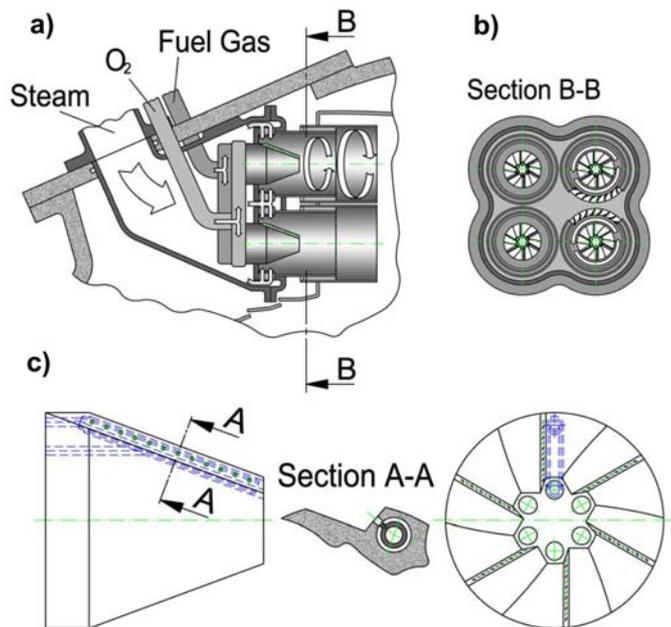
Details of a) burner design, b) burner quadruple arrangement, and c) detail of burner cone with nozzles for concentric flames of fuel and oxygen
